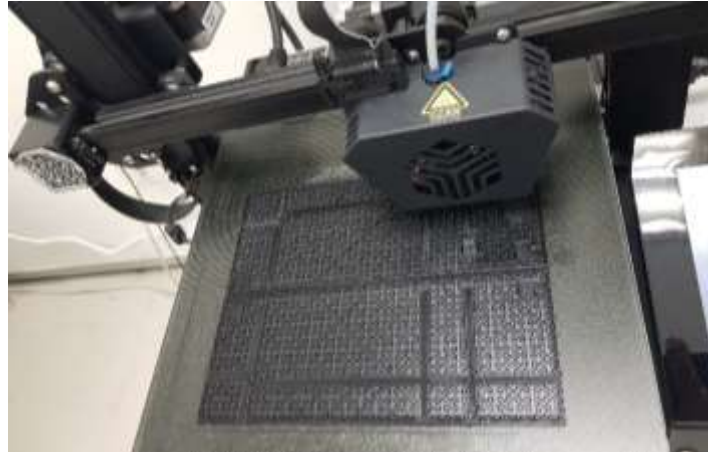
The 3D Printer Is Printing the Left and Right Battery Cases.
